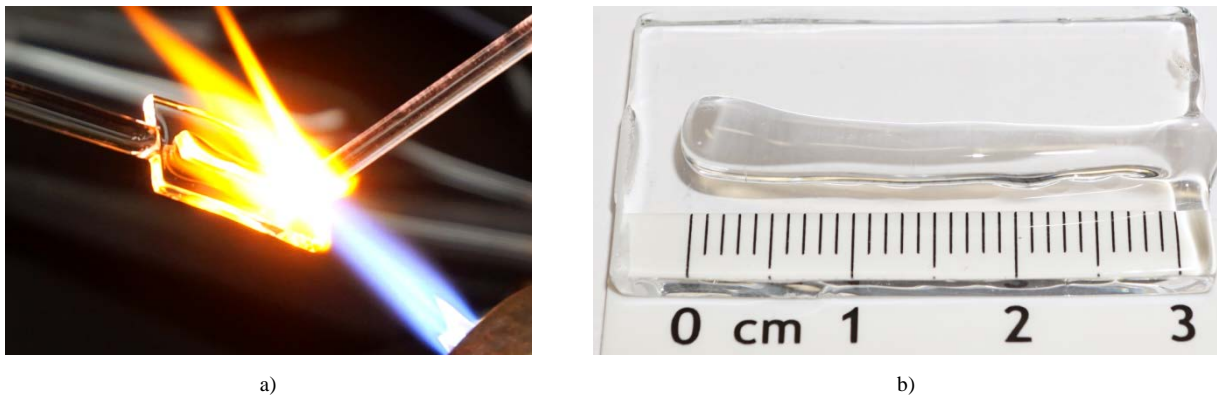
Line shaped glass joints (borosilicate glass): a) Manufacturing process; b) Perspective view
